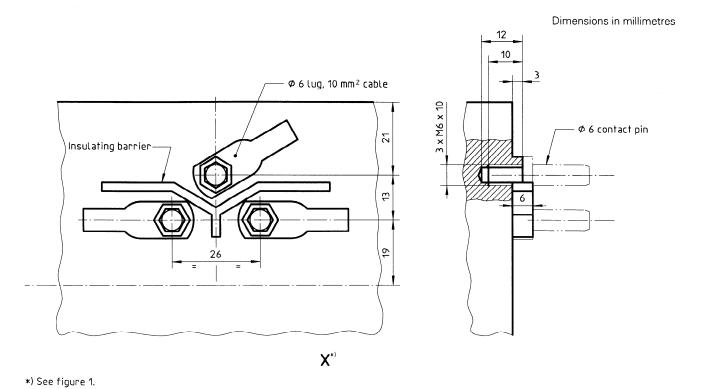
Size and location of the 3 M6 holes intended for supply connection of type H transformers
